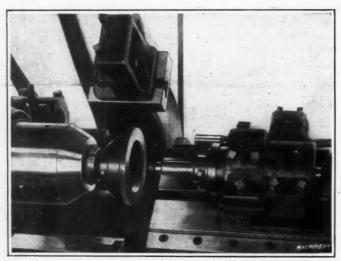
Standard Holder carrying Reamer and Counterboring Tool
